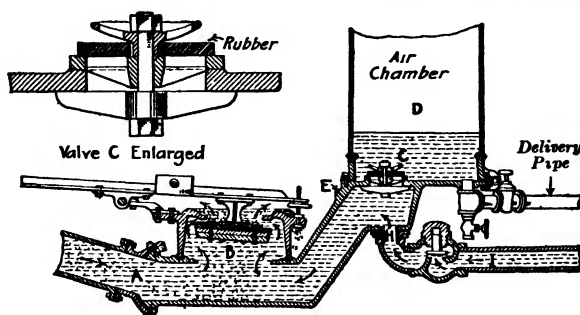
Cross-sectional elevation of hydraulic ram.
